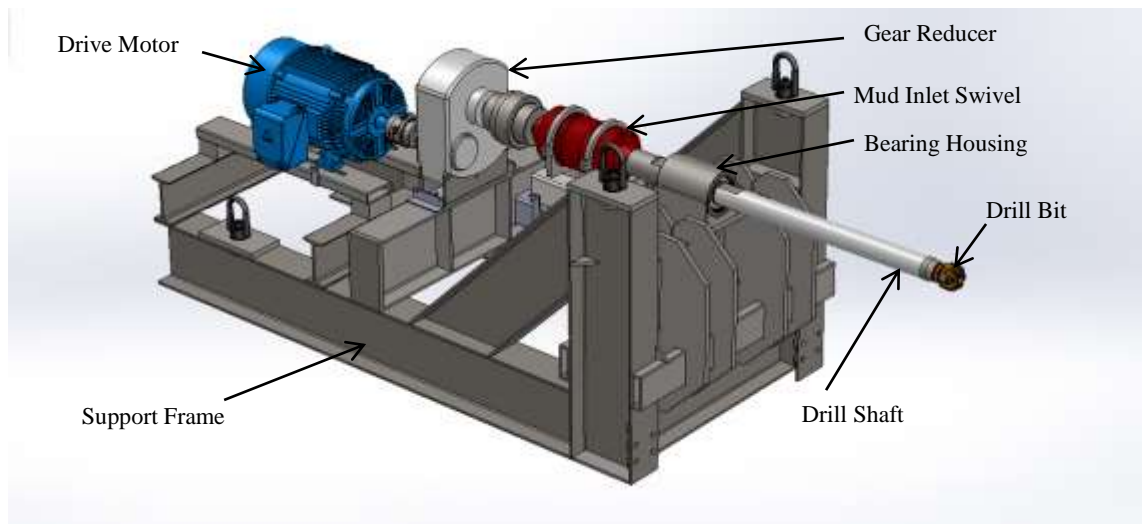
3D CAD model of the drill shaft drive assembly
